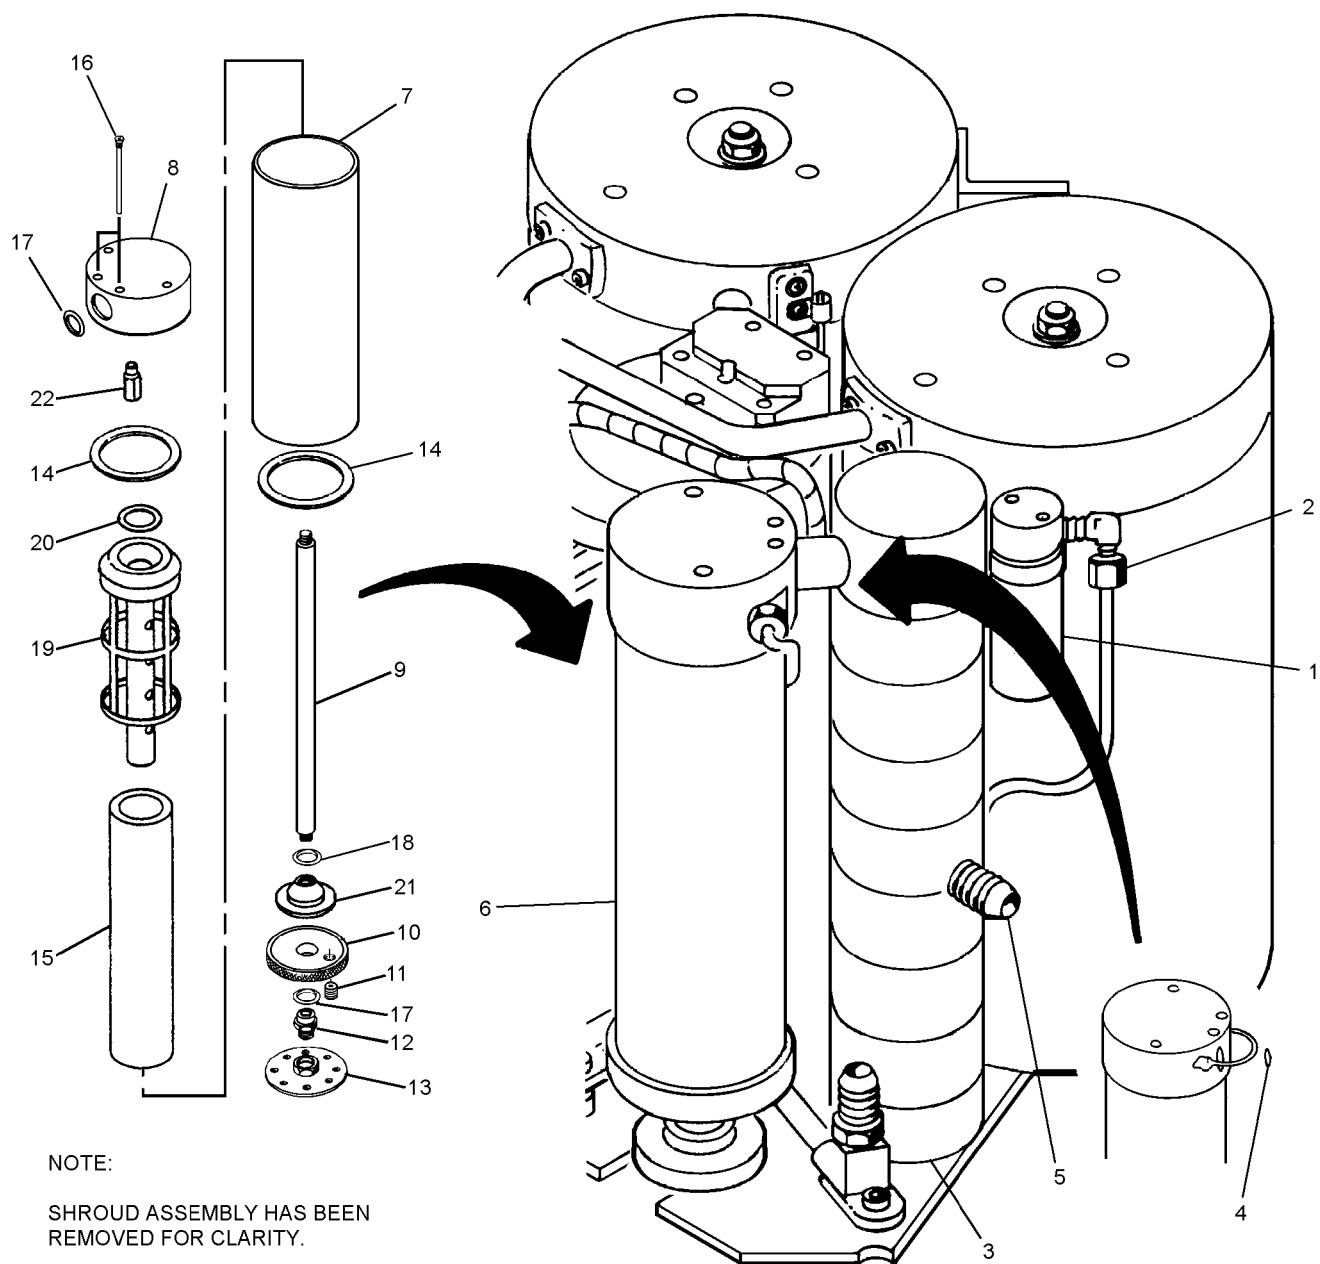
Solenoid Valve, Air Heater Assembly and Inlet Filter Assembly
